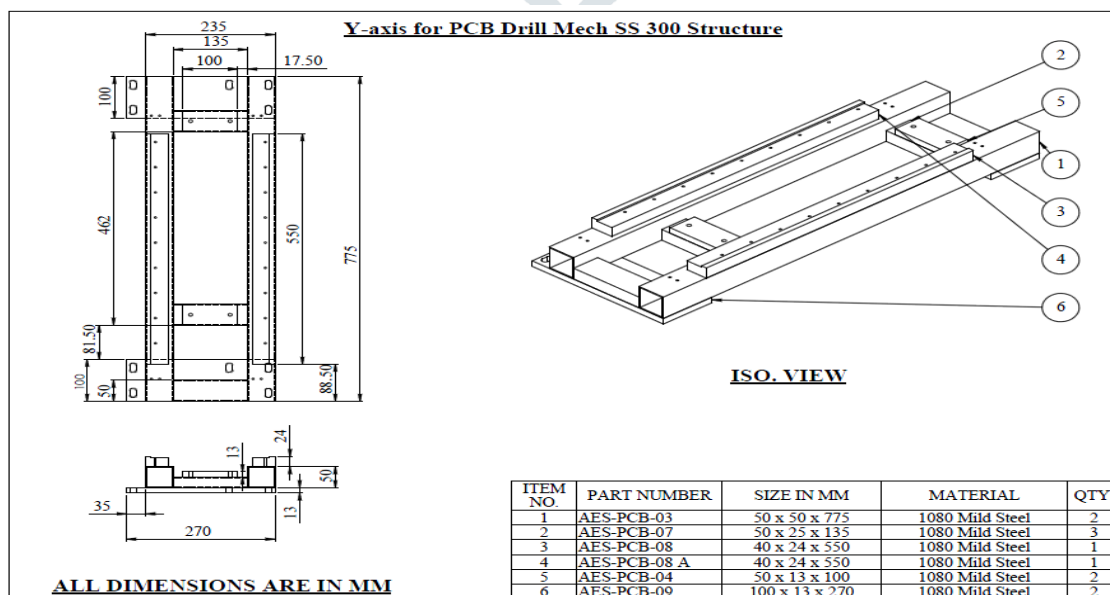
Detail view drawing Y-axis of PCB Drill Mech SS 300 Structure
